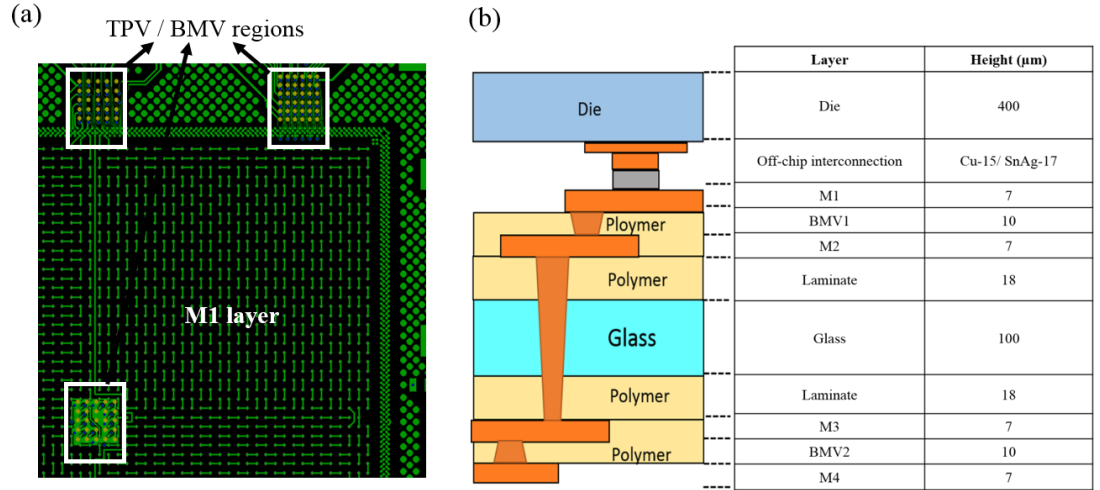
(a) Electrical design of fully-integrated application processor glass package and (b) detailed cross-section view of package stack-up.
